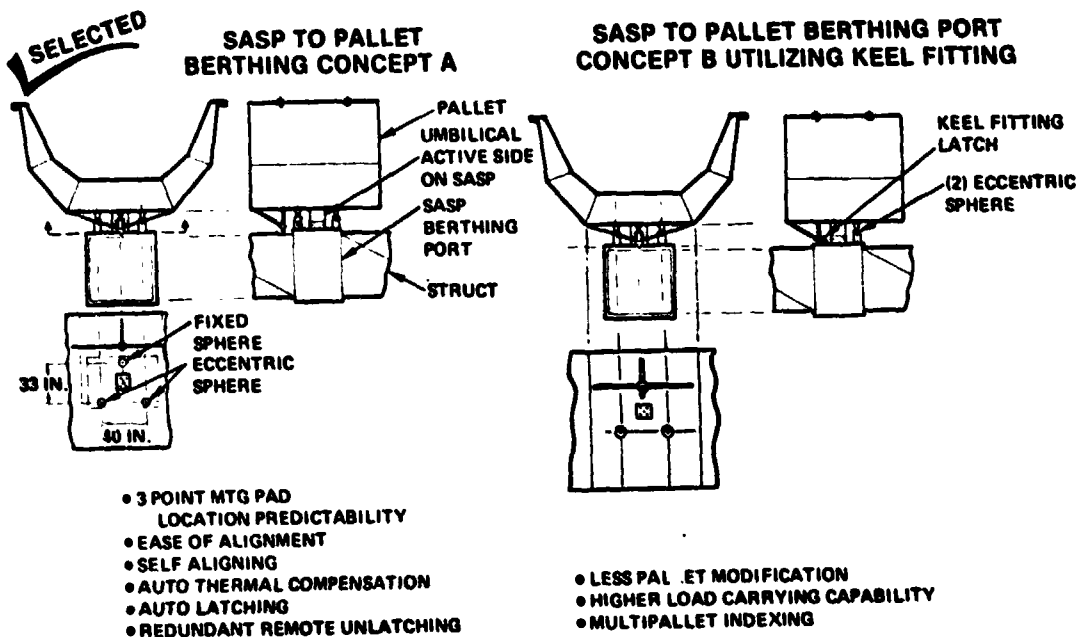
SASP to Pallet Berthing Interface Concepts
